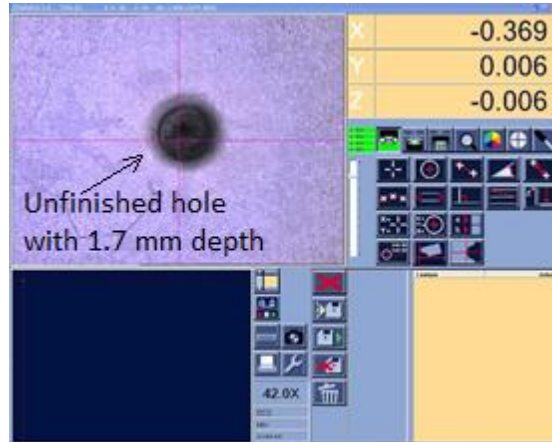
Micro hole on stainless steel (3.1 mm thickness), Nickel tool electrode, OCP= 3A
